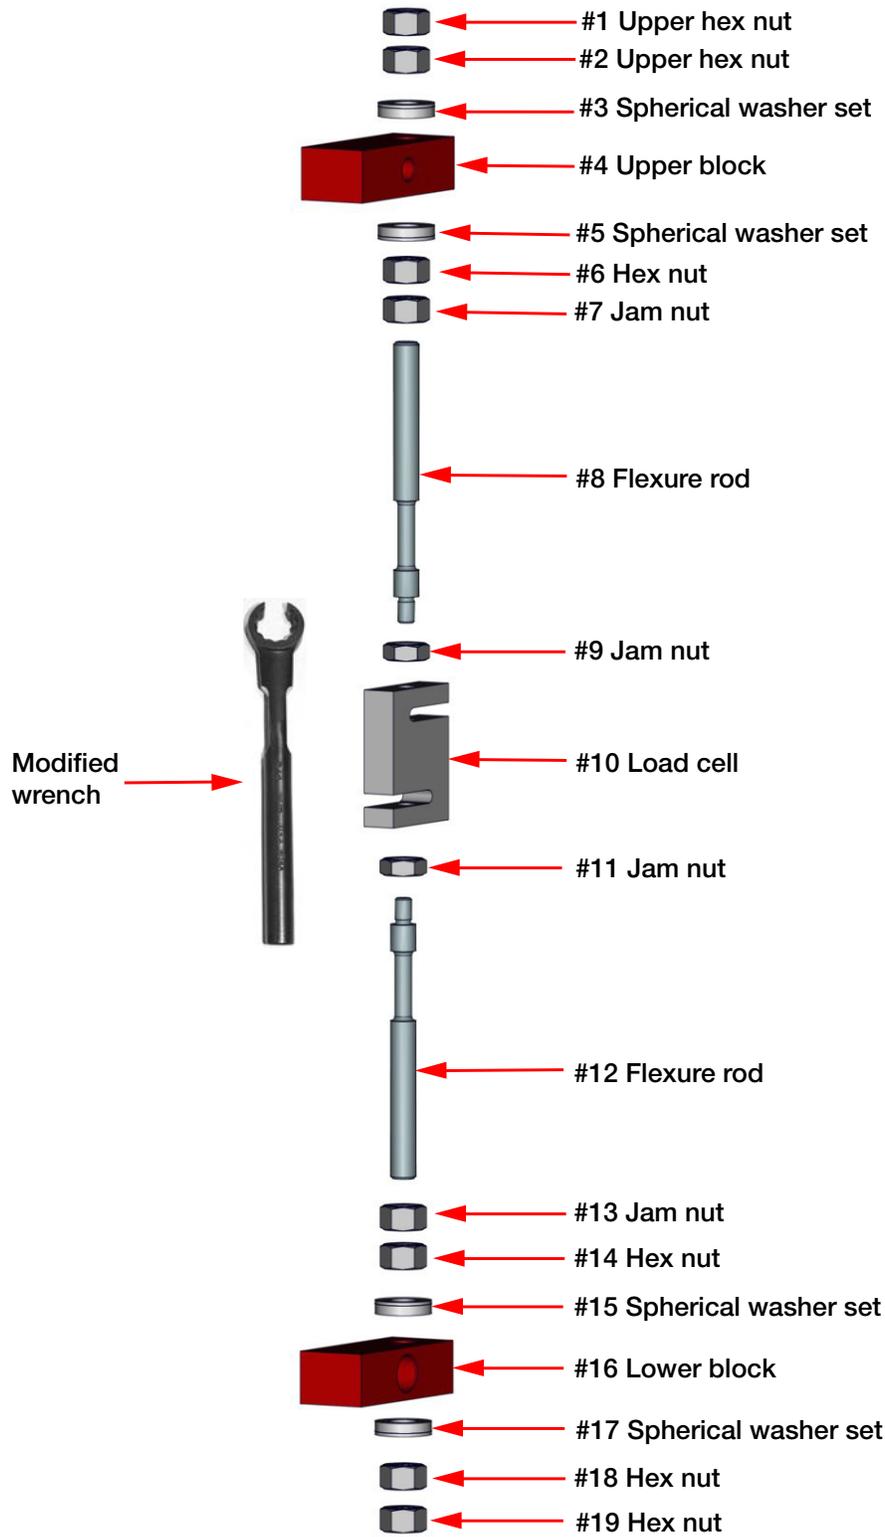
CLS-M Load Cell Assembly Parts Breakout
